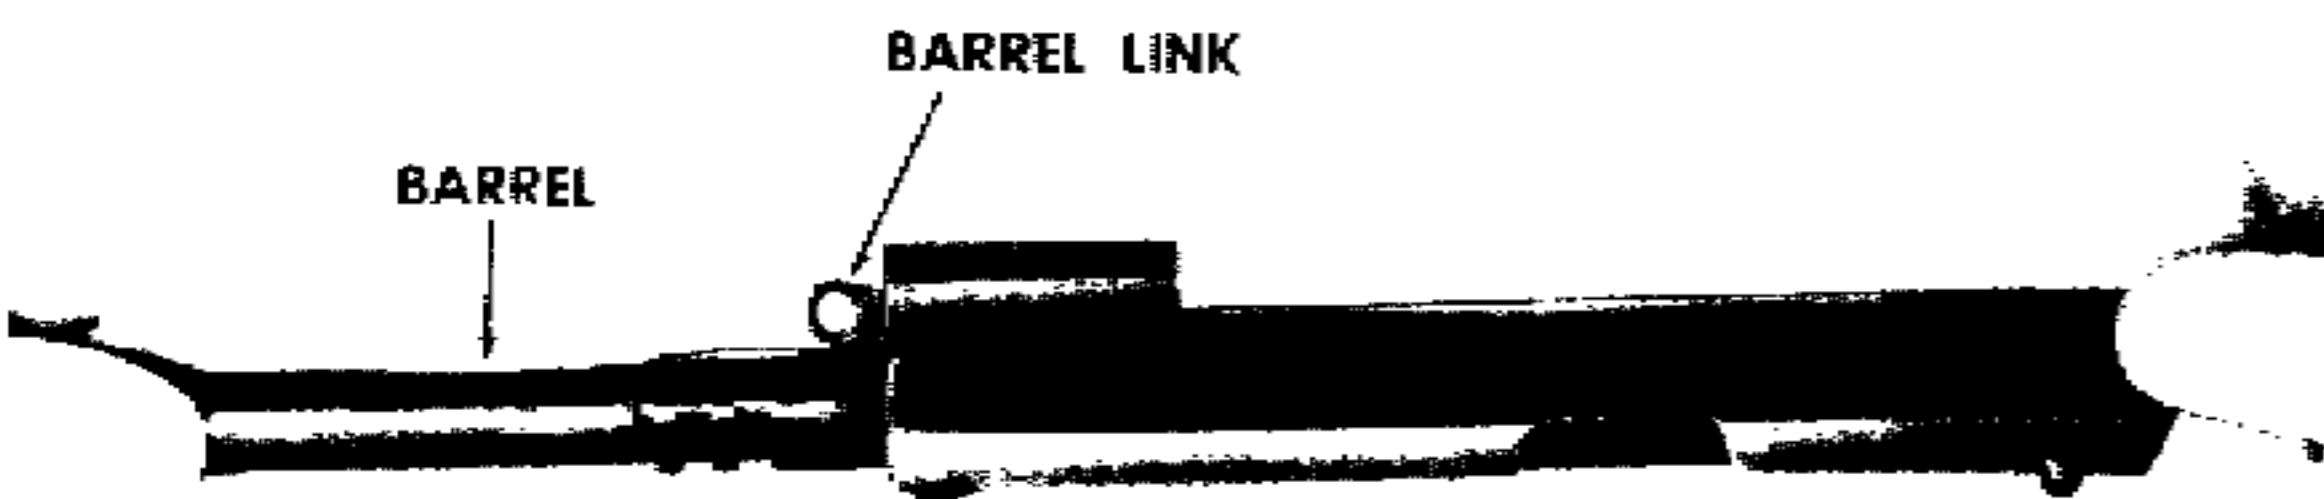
Push the barrel link forward and remove the barrel from the front end of the slide. This completes general disassembly.
